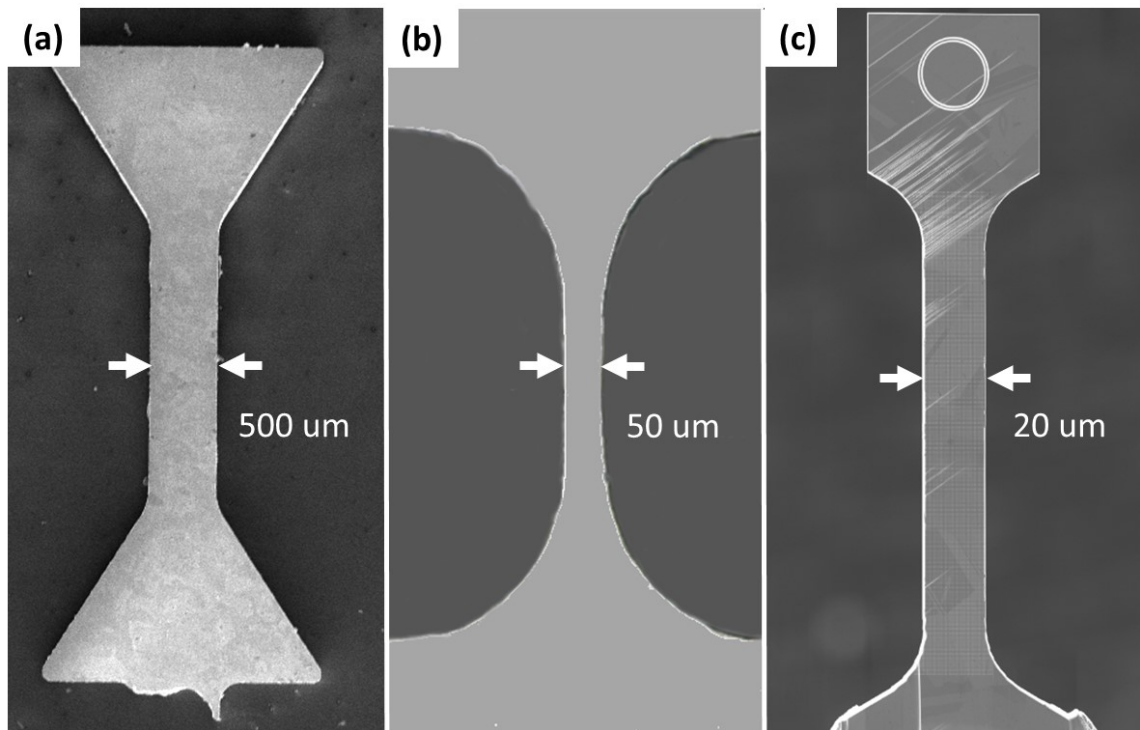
Images of microtensile samples machined using: (a) wire EDM, (b) fs laser and (c) FIB.
